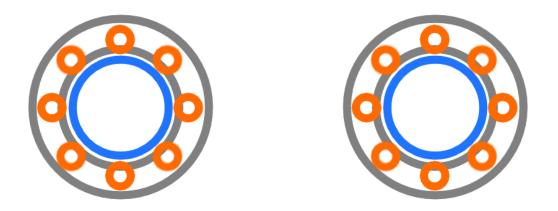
Round Linear Rail - Profile of a round linear rail. Gray is the linear bearings of the carriage. Orange is the ball bearings inside the linear bearings. Blue is the rail.
